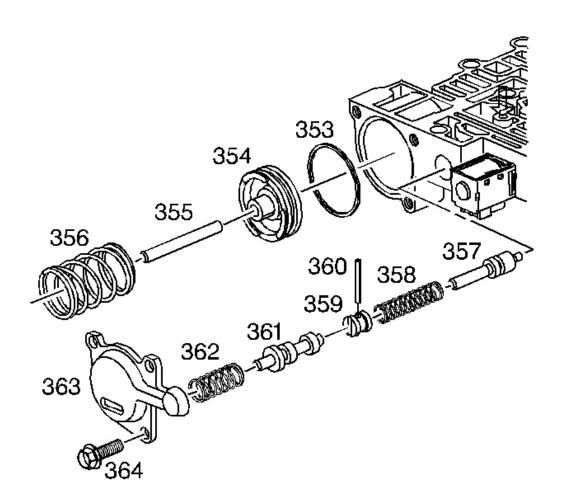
View Of Forward Accumulator, Low Overrun Valve & Forward Abuse Valve Components
